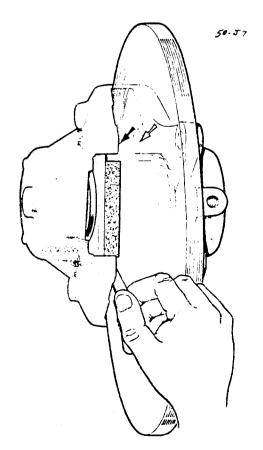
CHECKING GAP BETWEEN CALIPER & DISC
